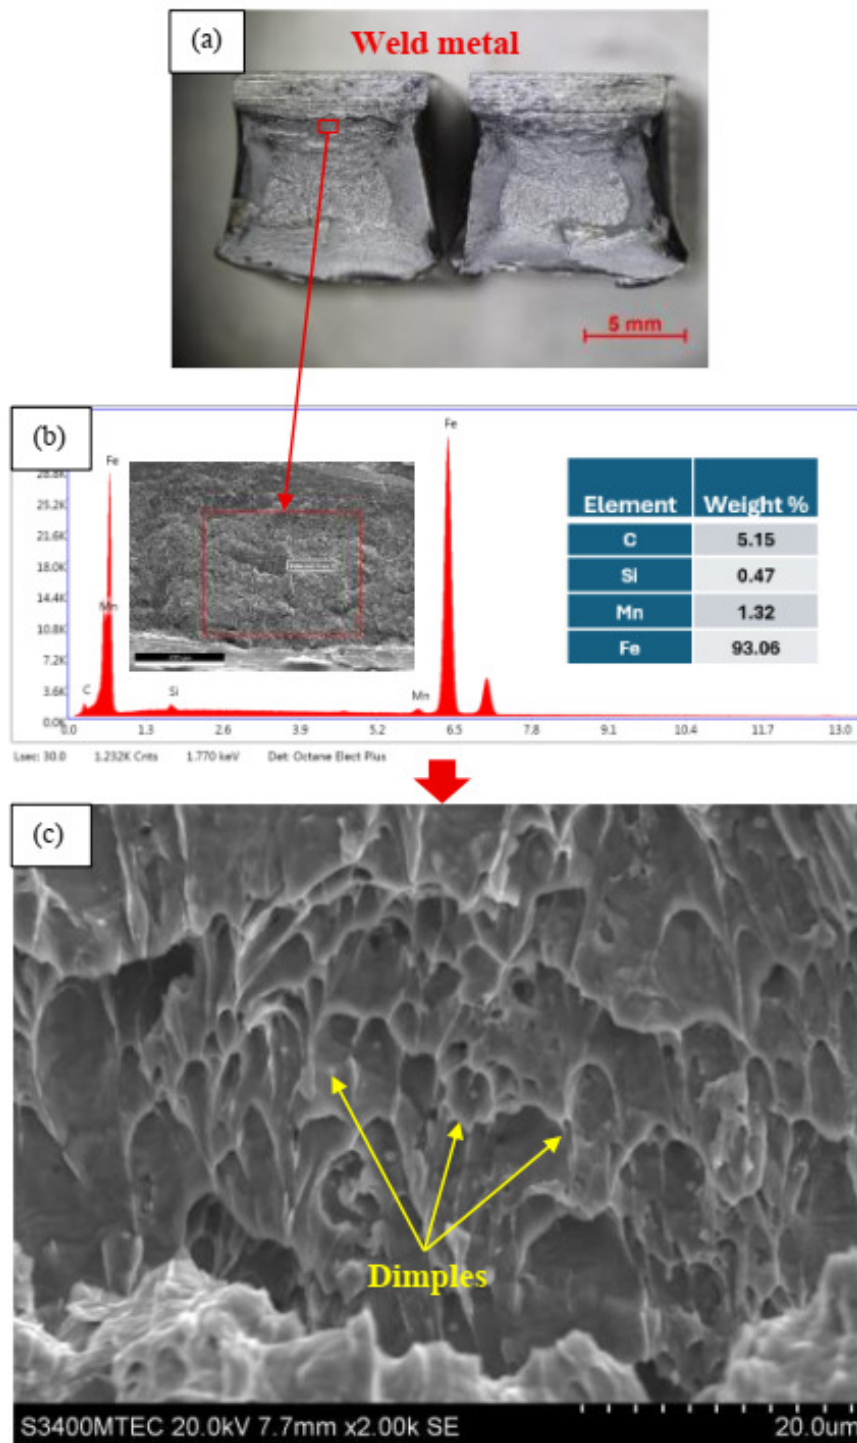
SEM micrograph showing: (a) fracture characteristics of the impact test specimen at the weld metal, (b) EDS analysis results at the weld metal, (c) enlarged image of the crack area demonstrating the appearance of a hole in the crack (dimples) at a magnification of 2.00 kx. 20 μm.
